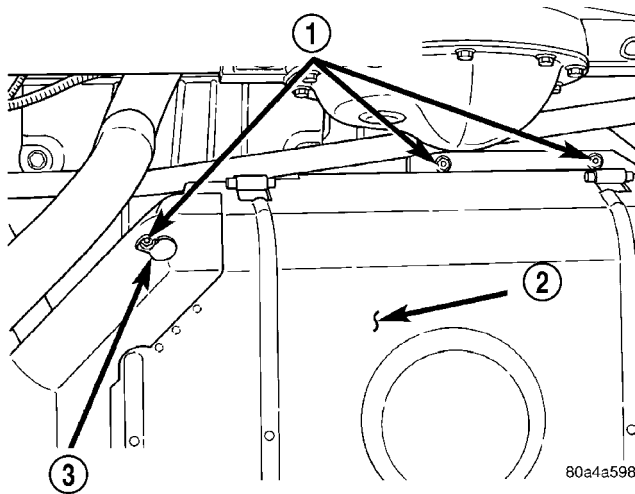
FUEL TANK MOUNTING NUTS - FRONT
